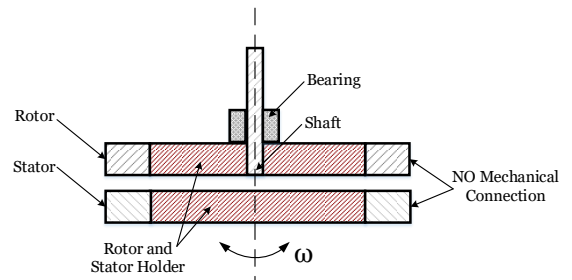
Cross-sectional view of the motor showing the mechanically isolated rotor and stator.
